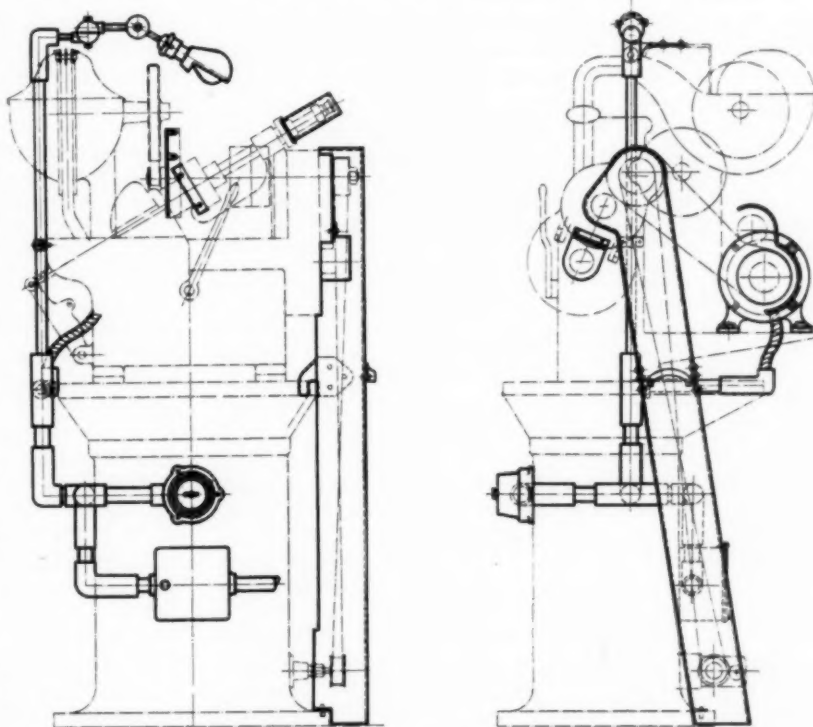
STANDARD MACHINE WITH ELECTRICAL EQUIPMENT AND GUARDS INSTALLED BY USER
